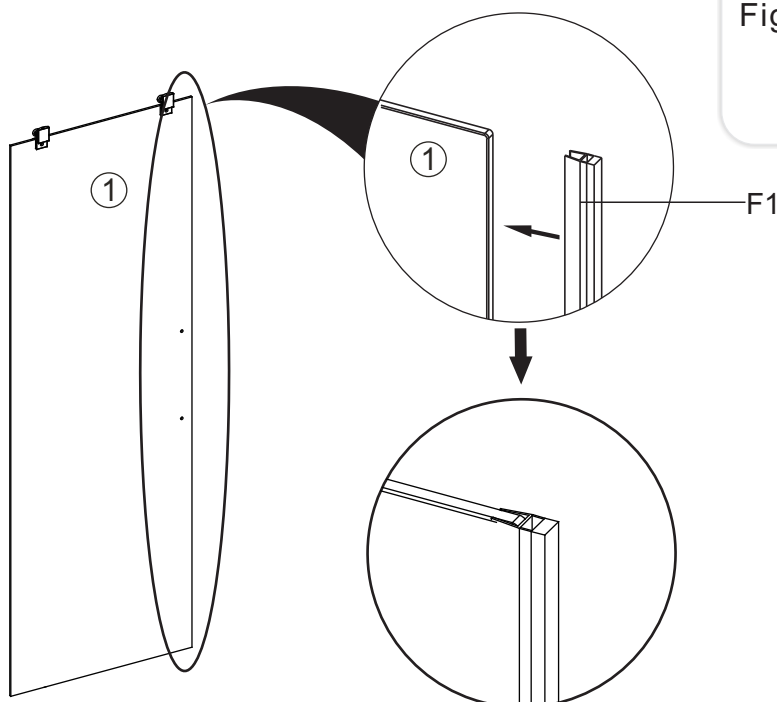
Install the PVC magnetic door seal (F1) on the door panel as shown illustration.
